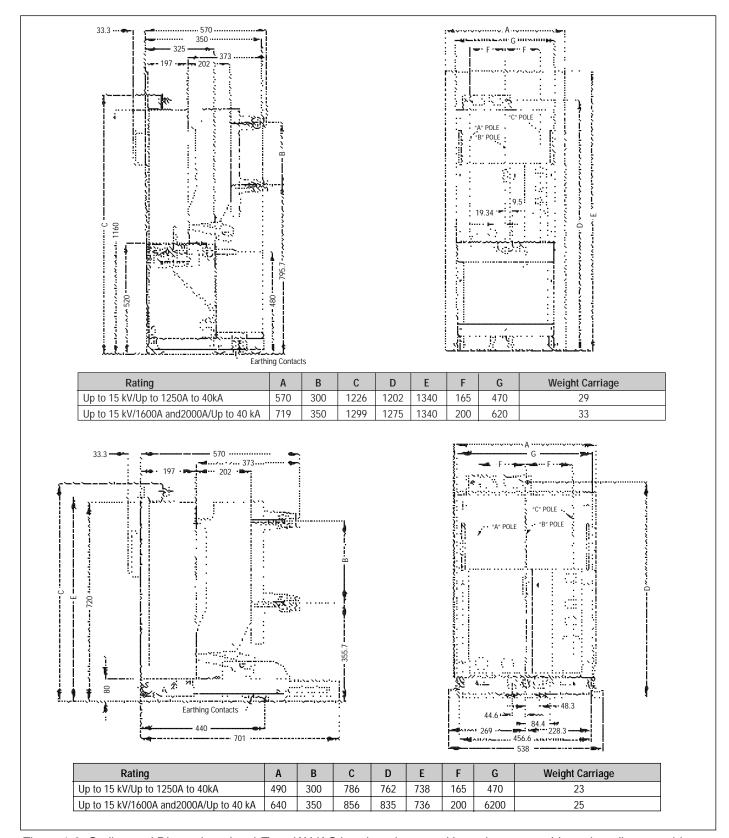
Outline and Dimensions (mm) Type W-VAC breaker element with carriage assembly and cradle assembly
